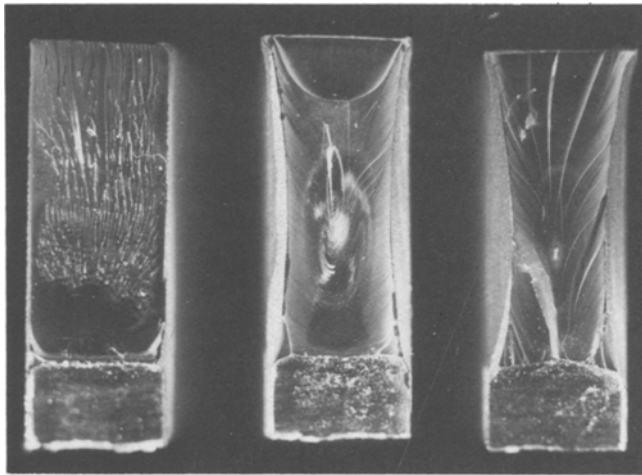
Typical fracture surfaces of brittle, semi-brittle and ductile failures in PC. The cut notches are at the lower ends of the surfaces.
